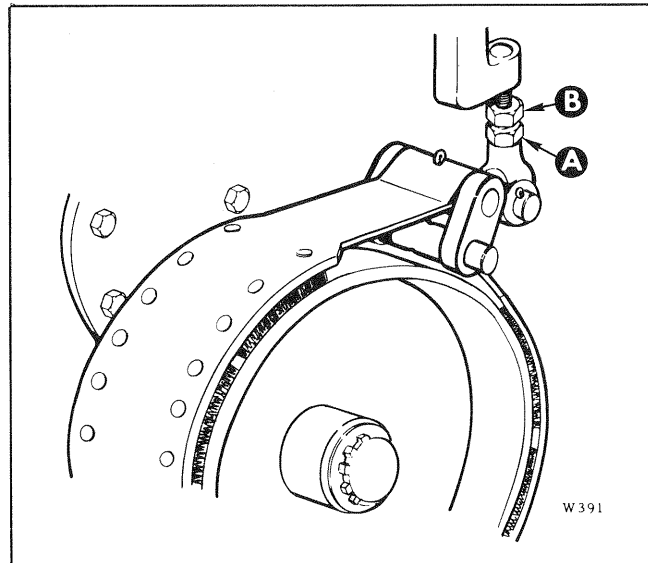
BRAKE BAND ADJUSTMENT
